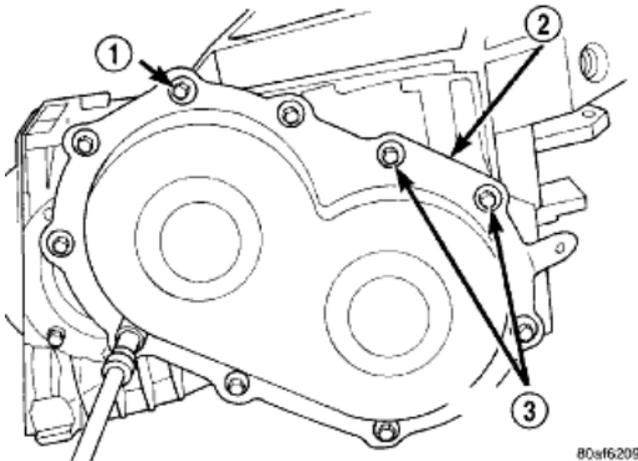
Removing/Installing Transfer Gear Cover-To-Case Bolts
